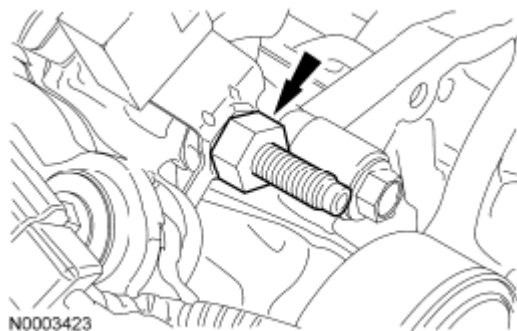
Locating Radio Ignition Interference Capacitor And Stud Bolt
